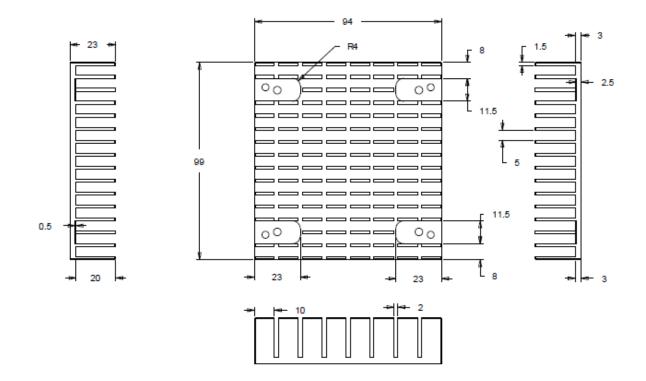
Dimensions of the Heat sink when viewed form Bottom and Side View
